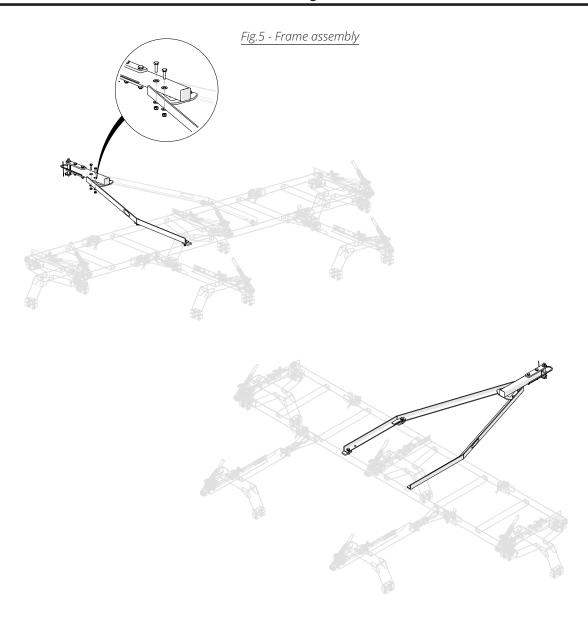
A - Assemble the A-frame assembly (outline of whole frame shown for reference).
